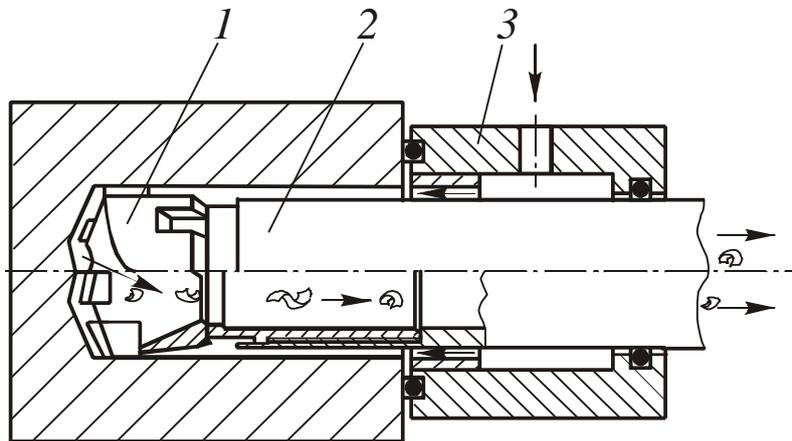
Deep hole drilling scheme with BTA drill head. 1 – BTA drill head, 2 – stalk, 3 – oil receiver.
